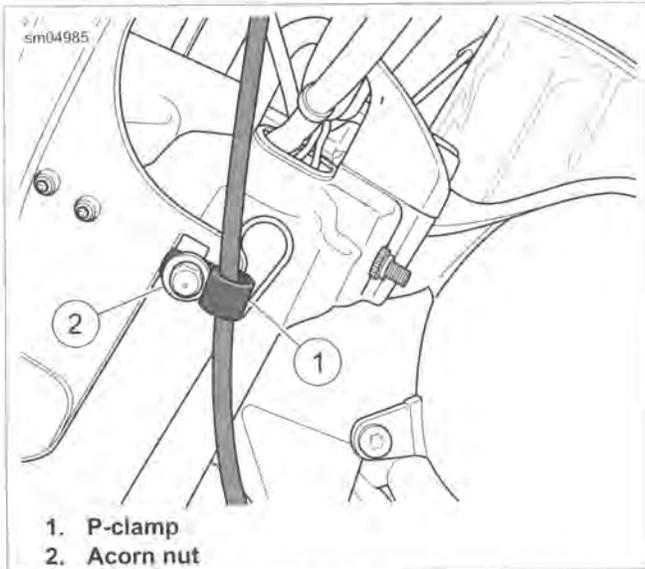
FLHR/C Clutch Cable Routing (Left Side View)
